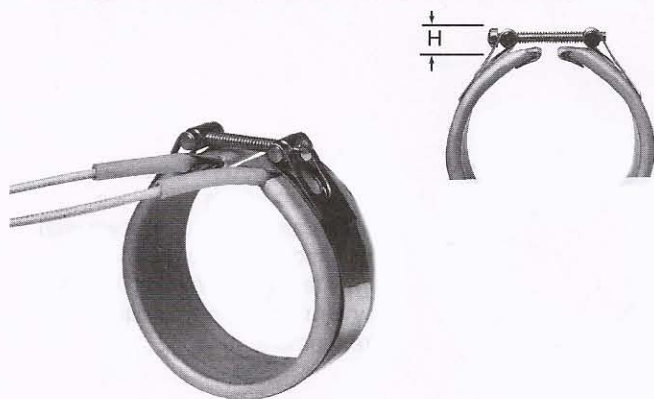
Strap—made from a low expansion alloy to tighten around the whole circumference of the heater. 5/16 socket head bolts included.
